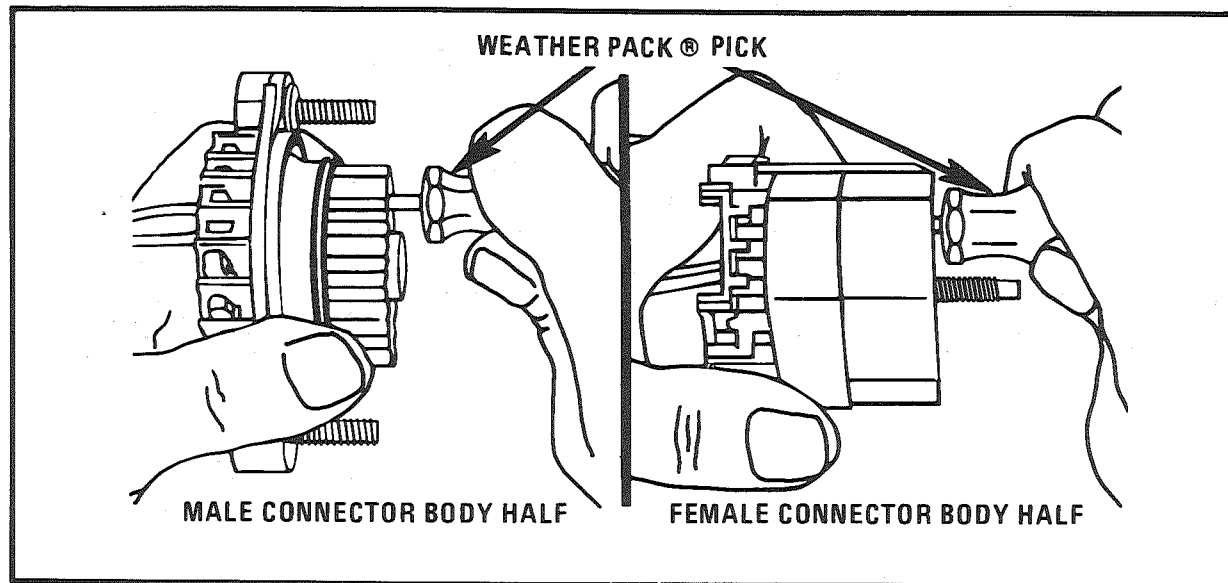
Releasing The Terminal Locking Tangs (Large Connector)
